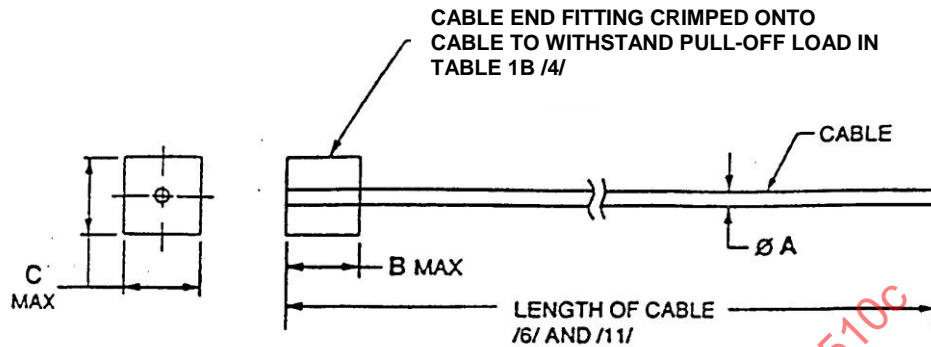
SAFETY CABLE-END FITTING AND CABLE
